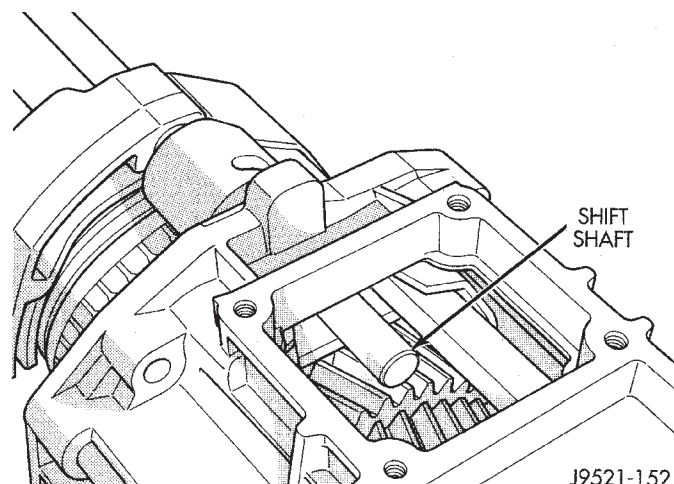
Inserting Shaft Into Lever Opening In Housing
